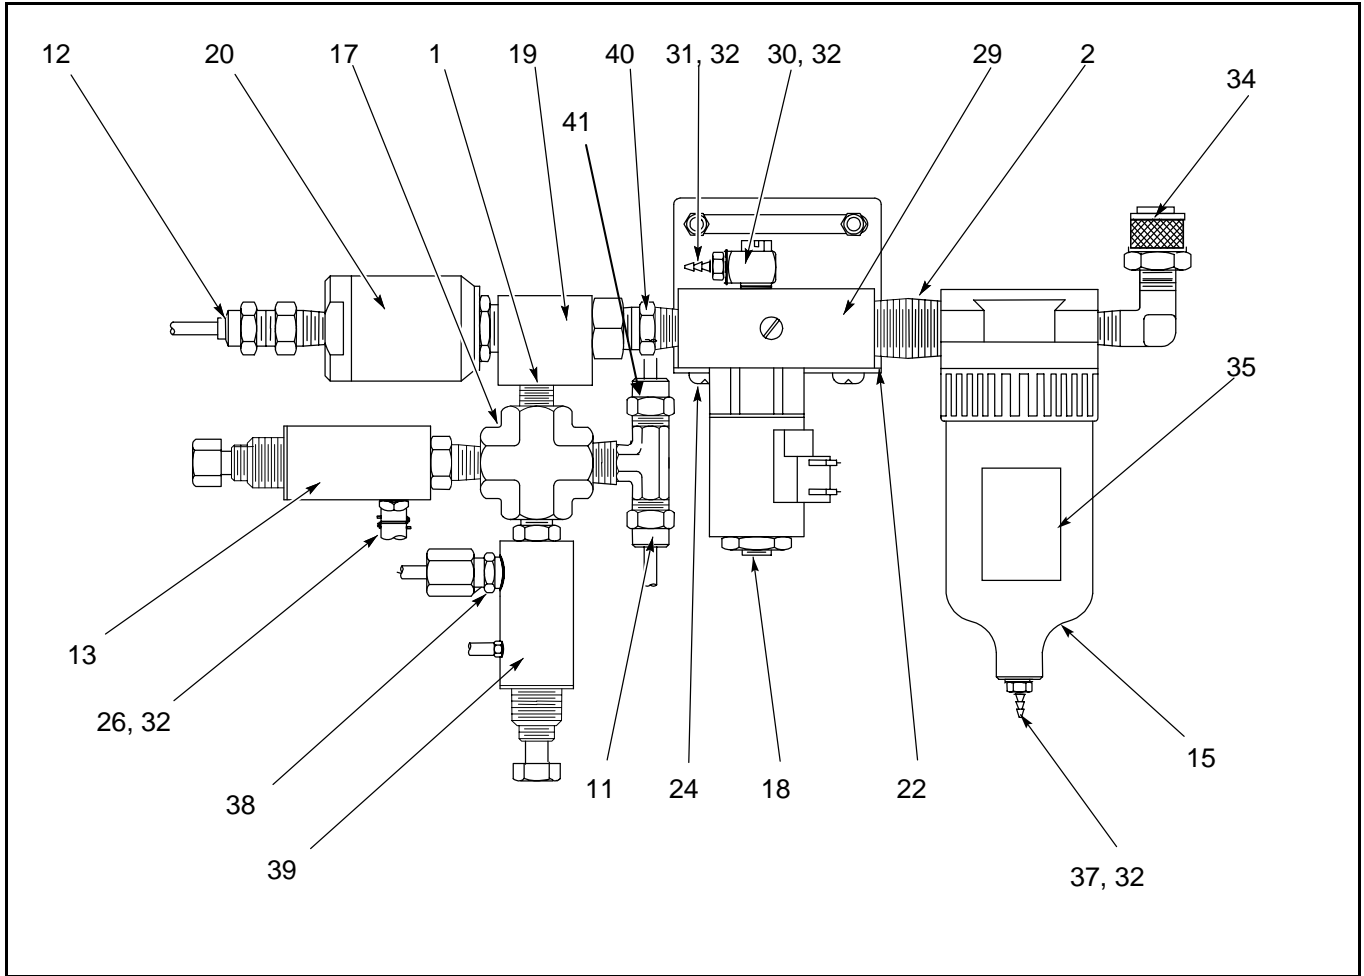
Input Air Manifold Assembly (P/N 355151)
